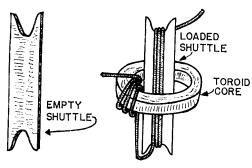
Details of a hand-winding system suitable for toroid inductors of medium or large dimensions. At A, a home-made winding shuttle fashioned from a piece of stiff cardboard or fiber insulating board. The sketch at B shows how the wire is wound on the shuttle (see text) and passed through the toroid core, again and again, until the winding is in place. The turns should be evenly spaced around the circumference of the form, maintaining uniform spacing between turns. Multi-layer inductors can have their turns close-wound and over one another.
